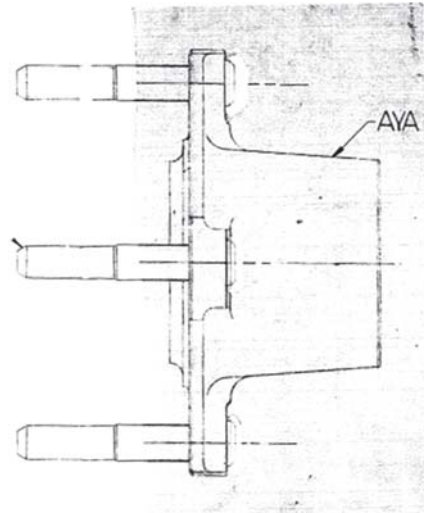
Hub assembly Leyland Mini S AYG7065.
